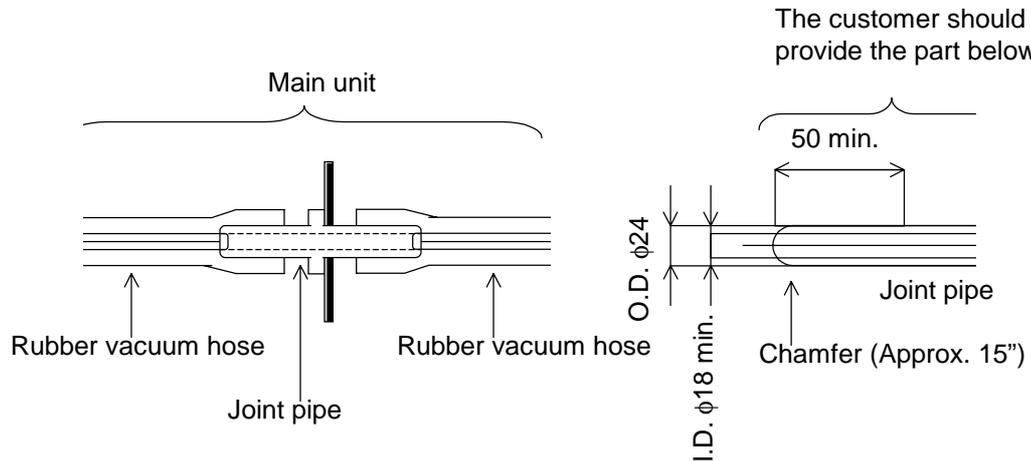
Rubber vacuum hose connection and joint pipe dimensions
